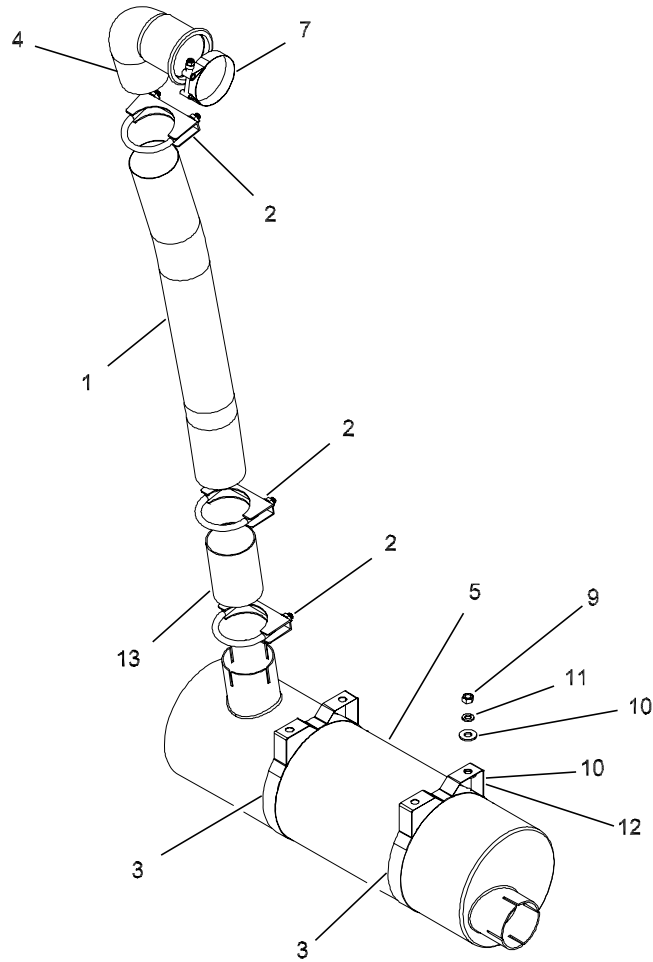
EXHAUST ASSEMBLY, CUMMINS
